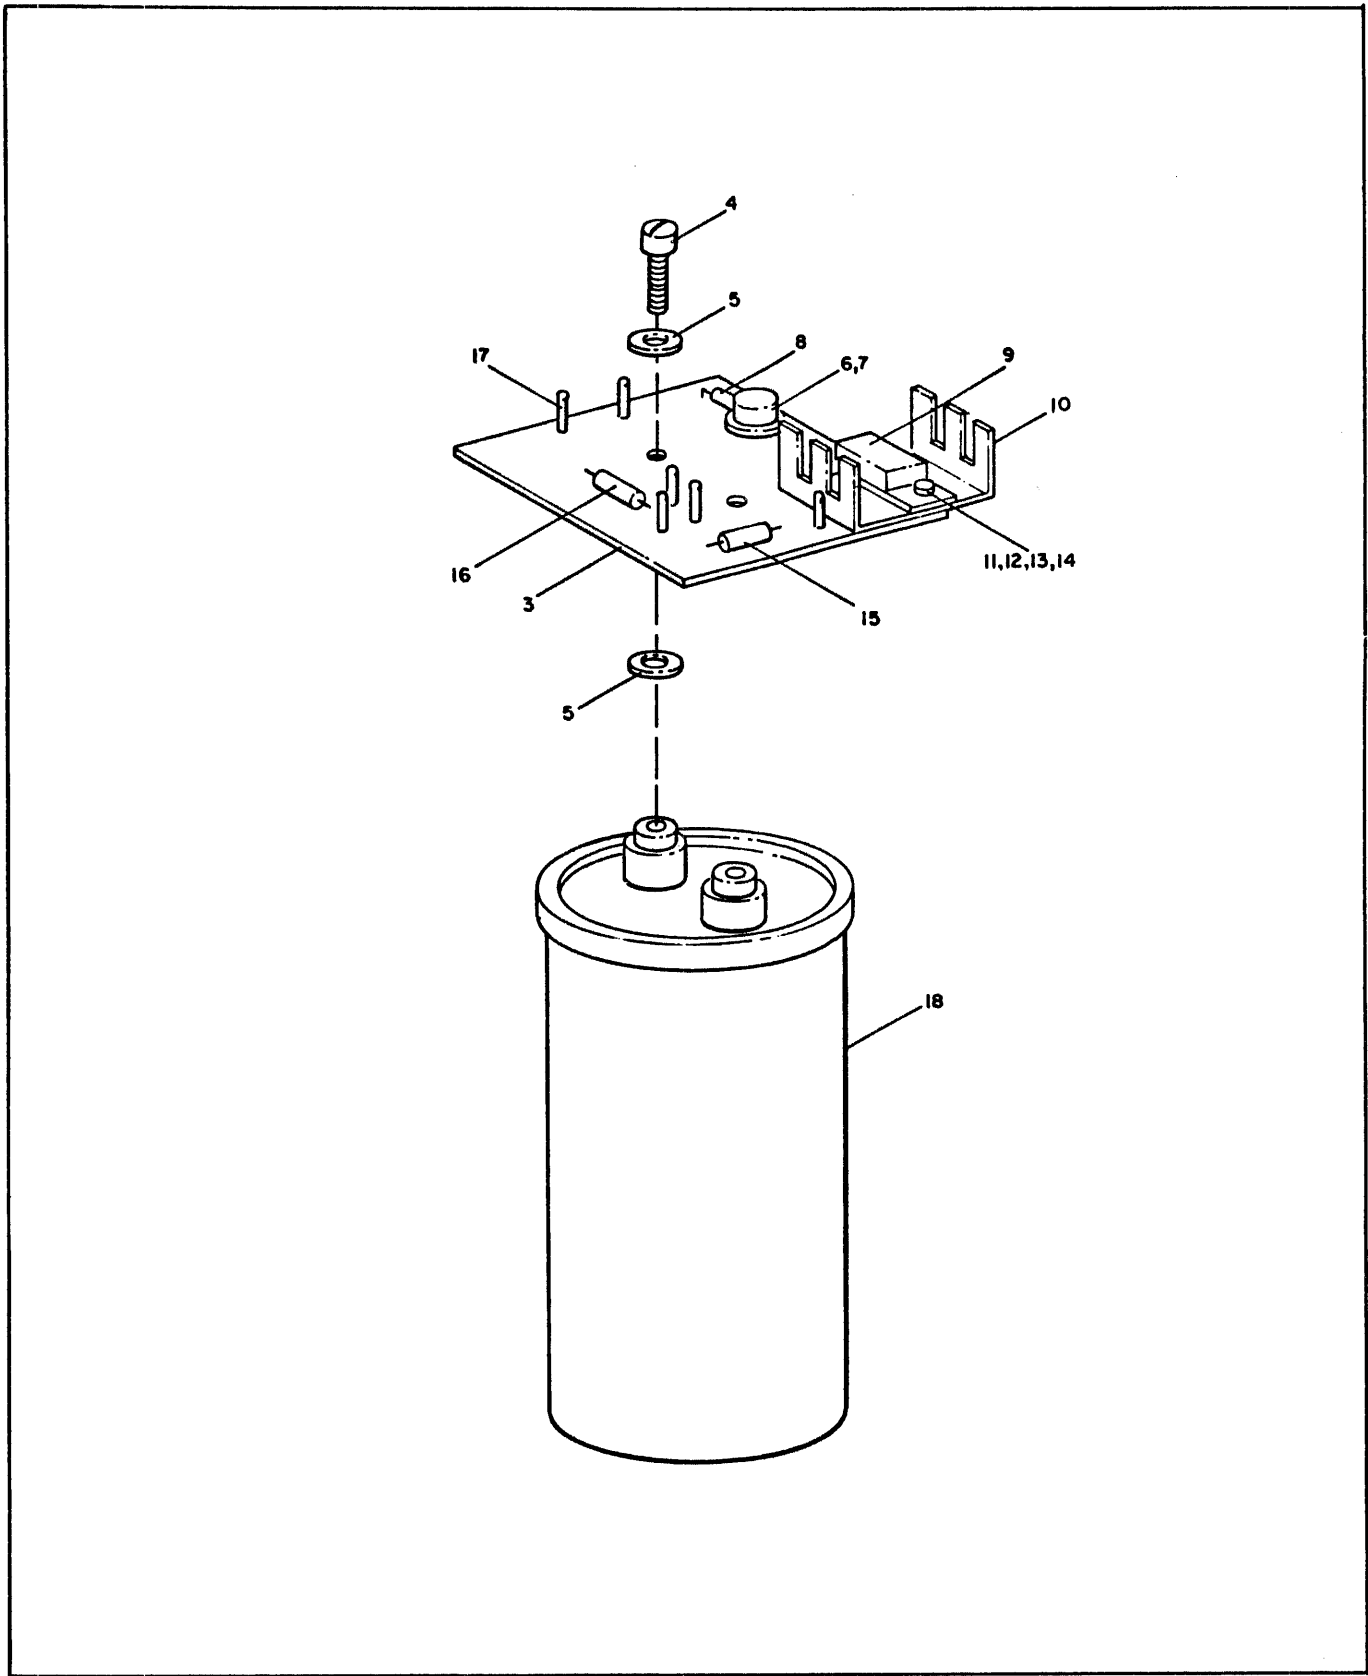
BASE PLATE ASSEMBLY (sheet 2 of 2)
